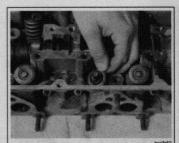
All aluminum and some cast iron heads will have these valve spring shims. Remove all of them as well
